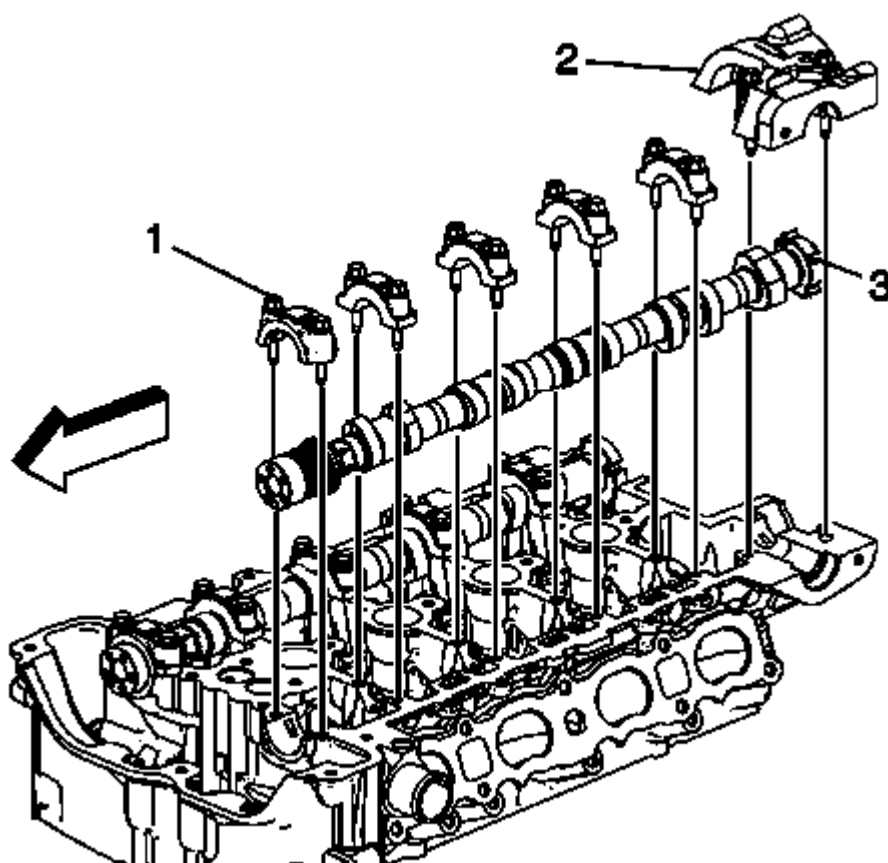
Intake Camshaft Bearing Rear Cap Bolts And Cap
